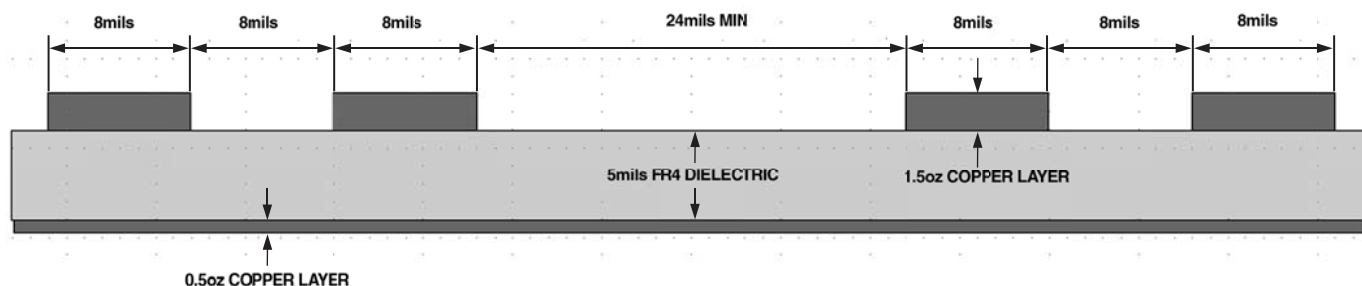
Cross-Sectional Layout and Dimensioning (To Scale) of Differential
